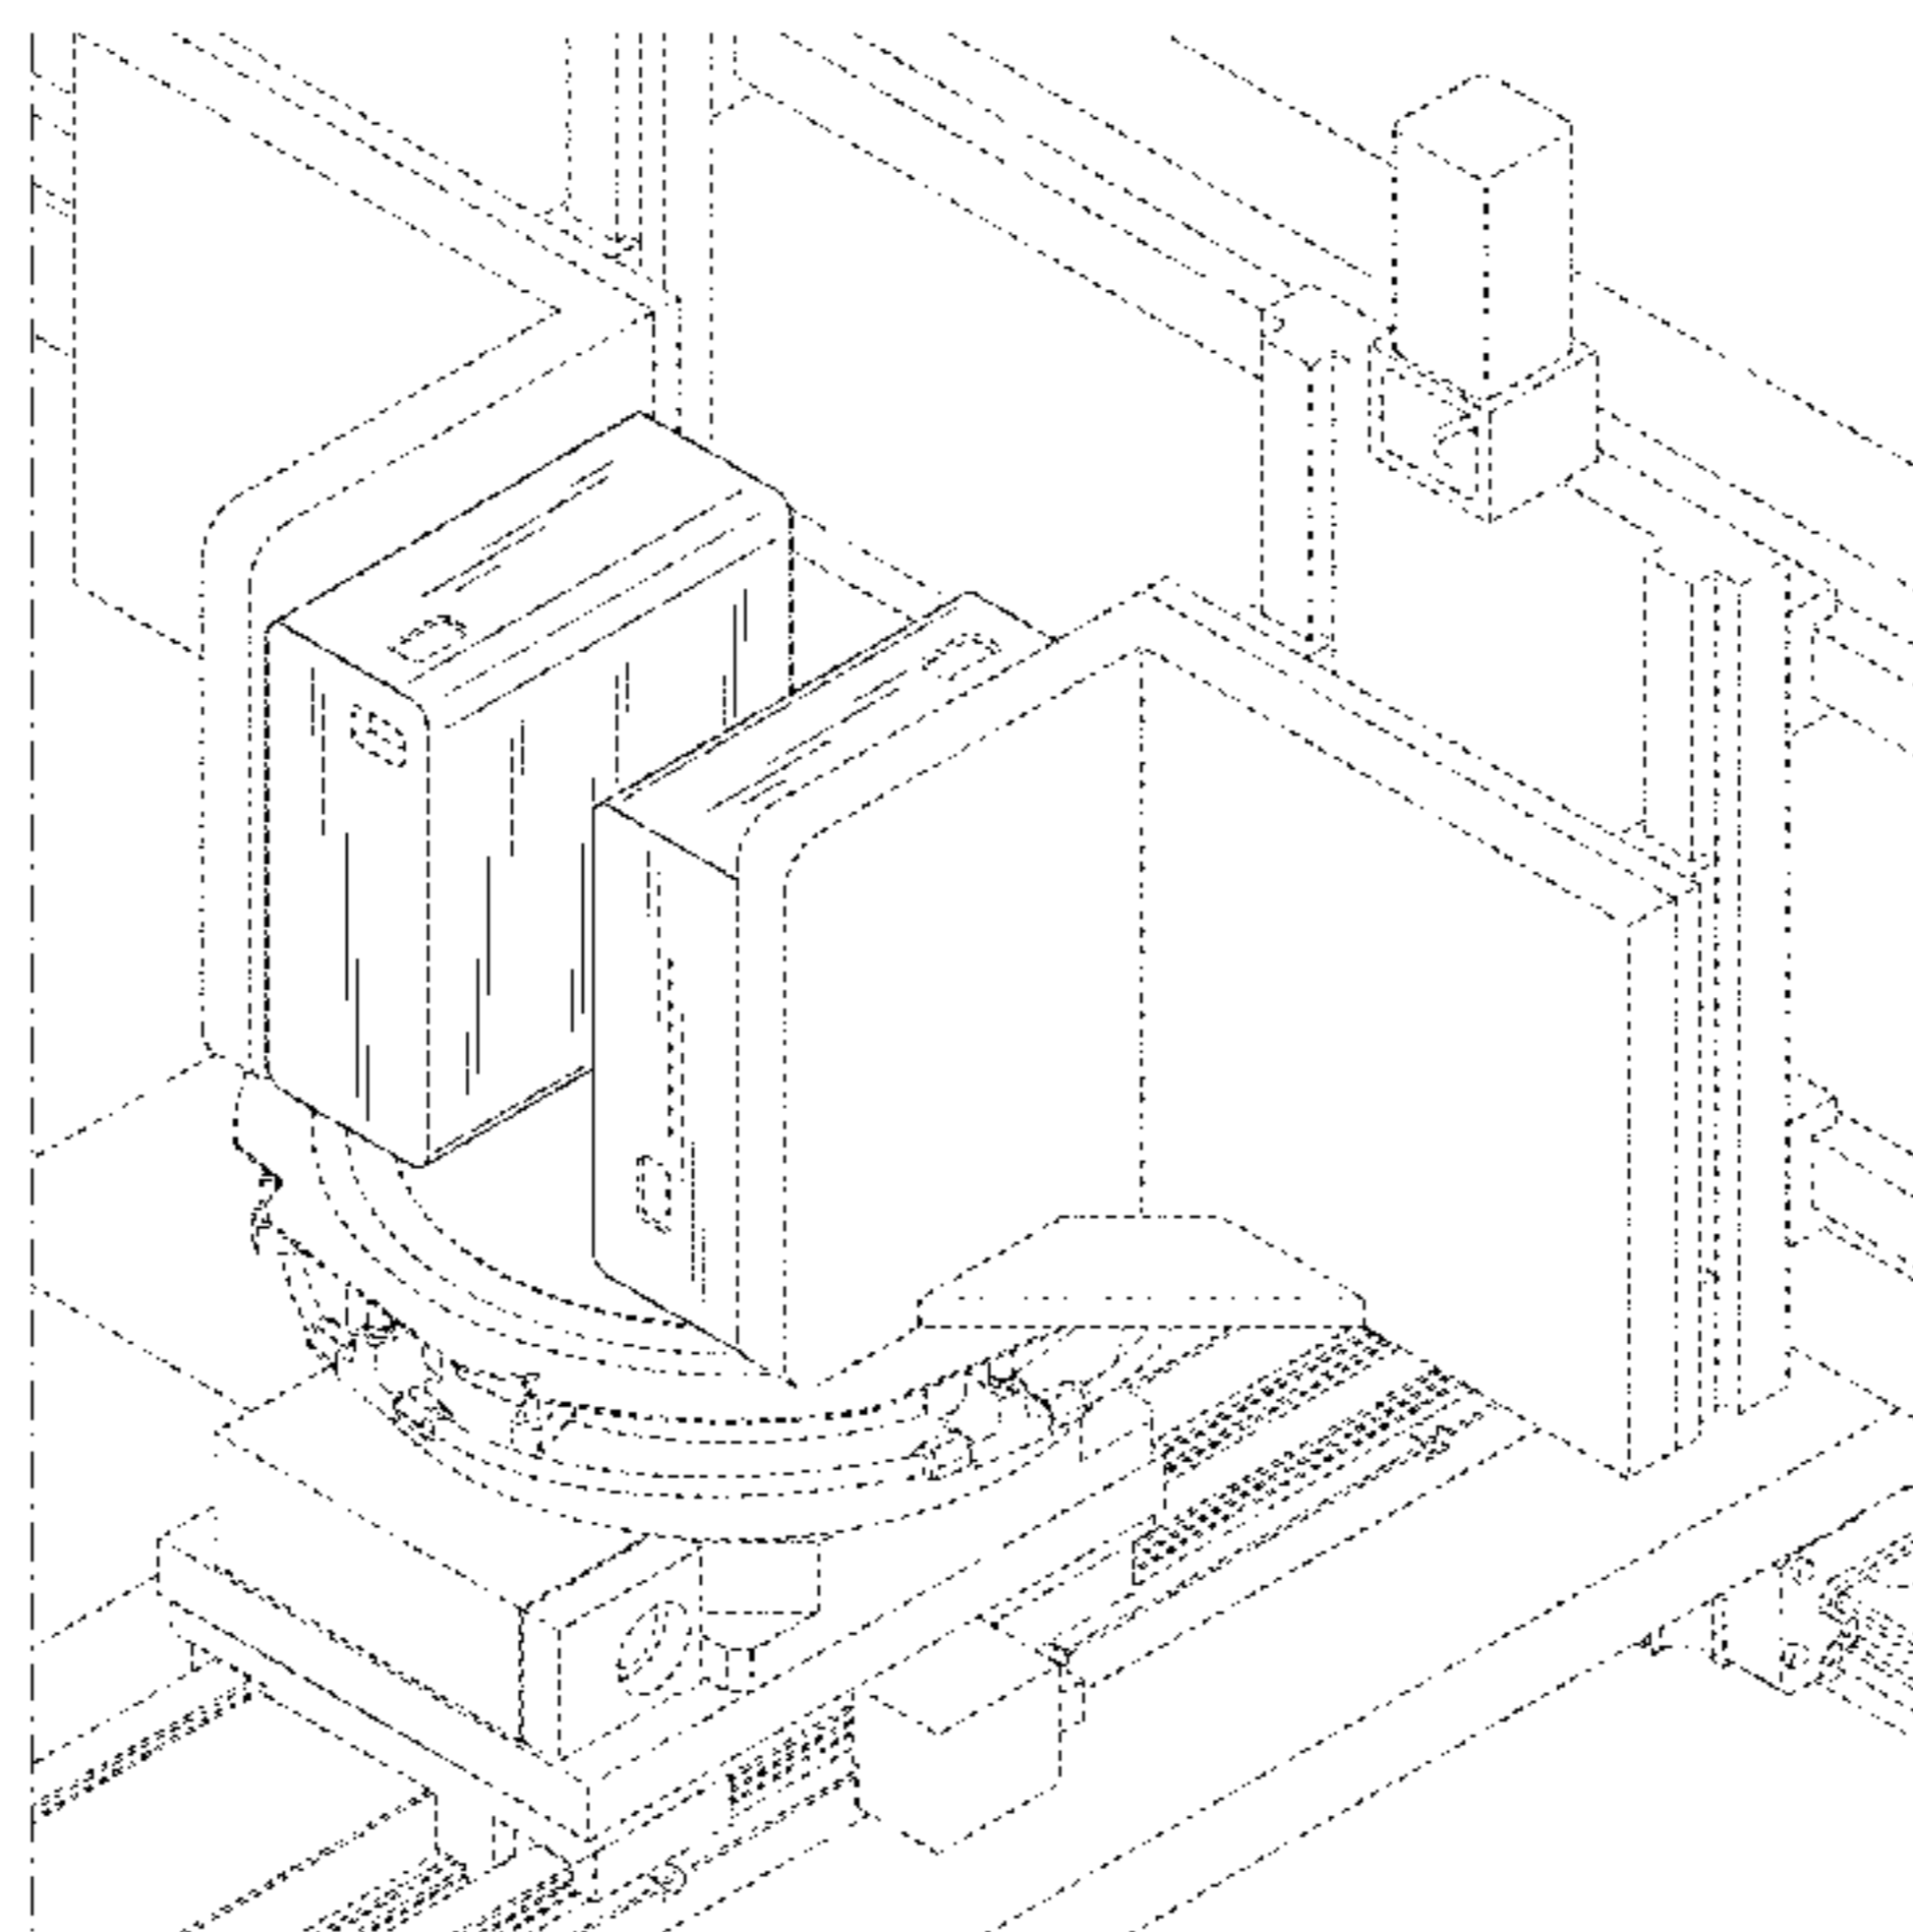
is an enlarged perspective view 2 of the left-side processing part in FIG. 7, which is shown symmetrical to the enlarged perspective view of the right-side processing part in FIG. 7; and,
